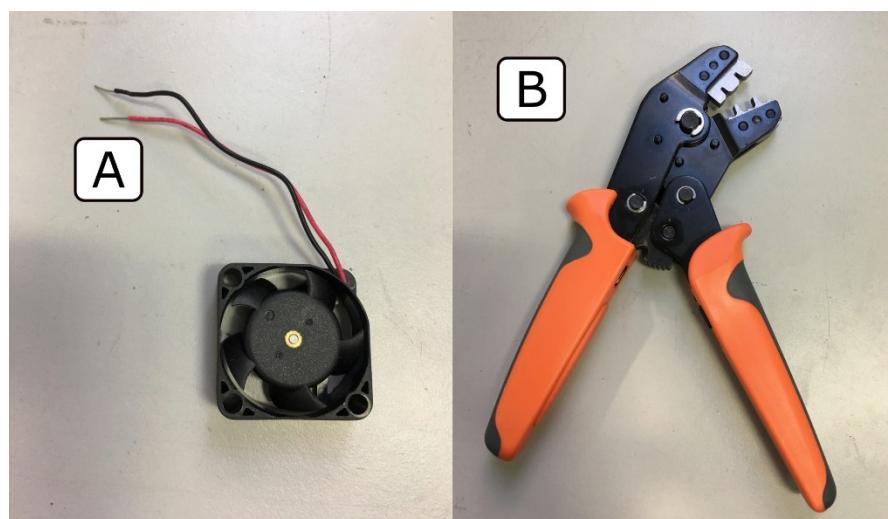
A) 25 x 25 mm DC fan with shortened and stripped wires B) Crimping tool
